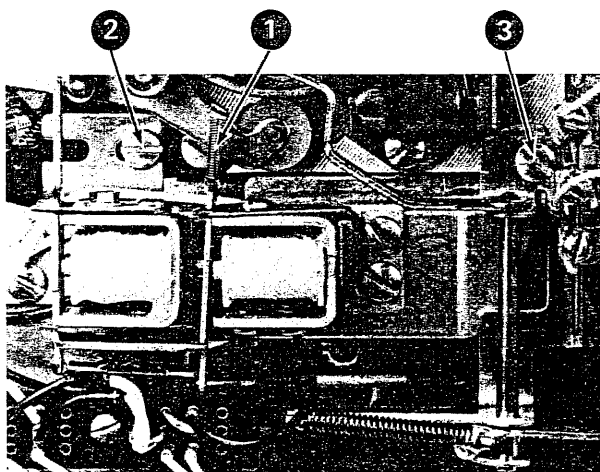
Shift-Magnet-Assembly Removal (Steps 1-3)
